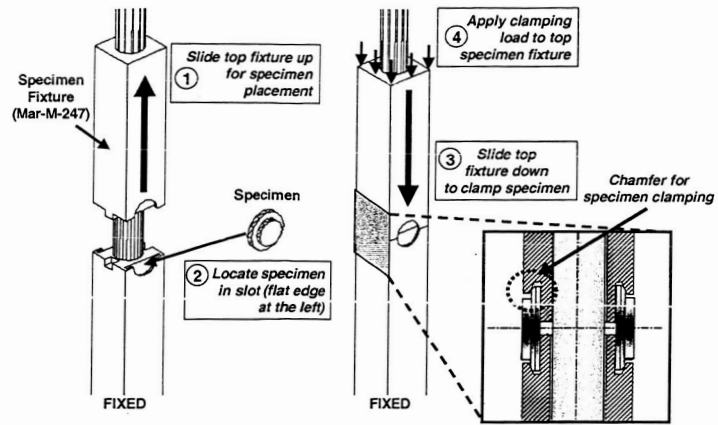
A schematic of the specimen fixture highlighting the specimen clamping procedure.
